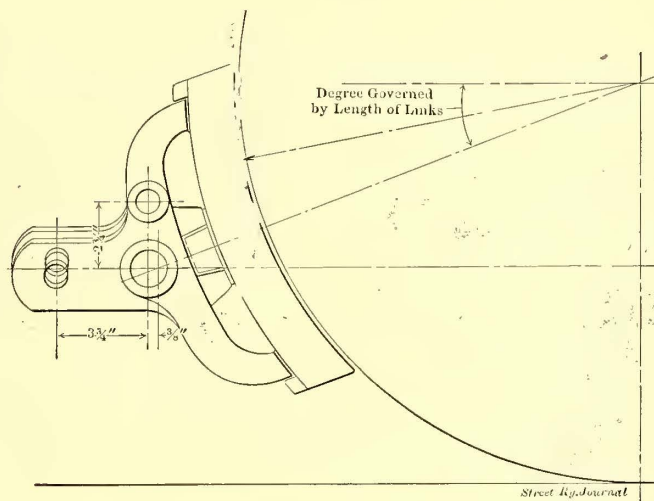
PIVOT POINT ON BRAKE-SHOE HEAD A TRIFLE BELOW CENTER LINE OF HEAD
